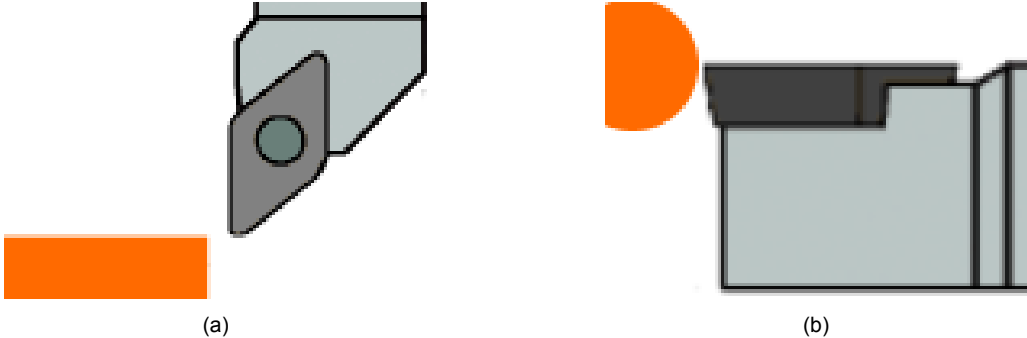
Tool mounting configuration (a) top view (b) frontal view
